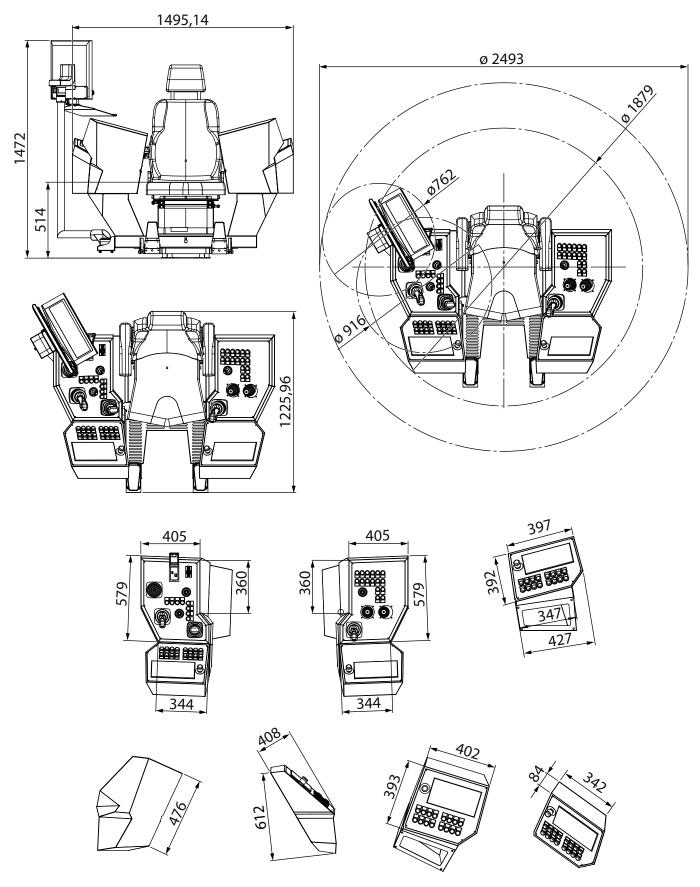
Control stand SV1C Premium-Line: Dimension drawing 2 (dimensions in mm)
